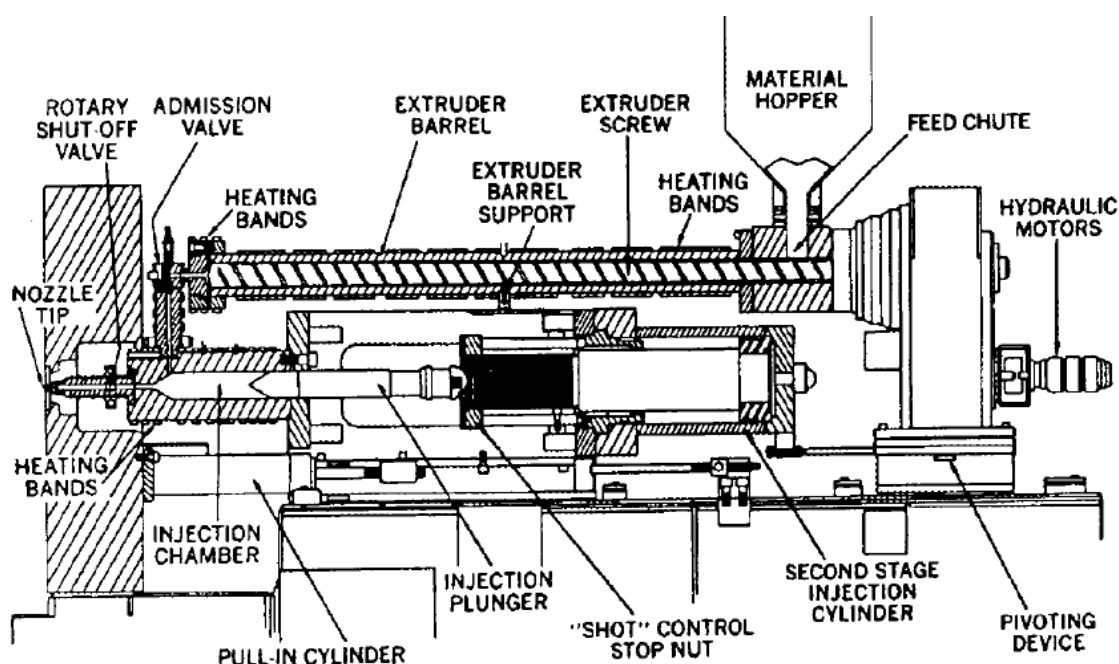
Two-stage screw-plunger injection-molding machine.¹²⁸
